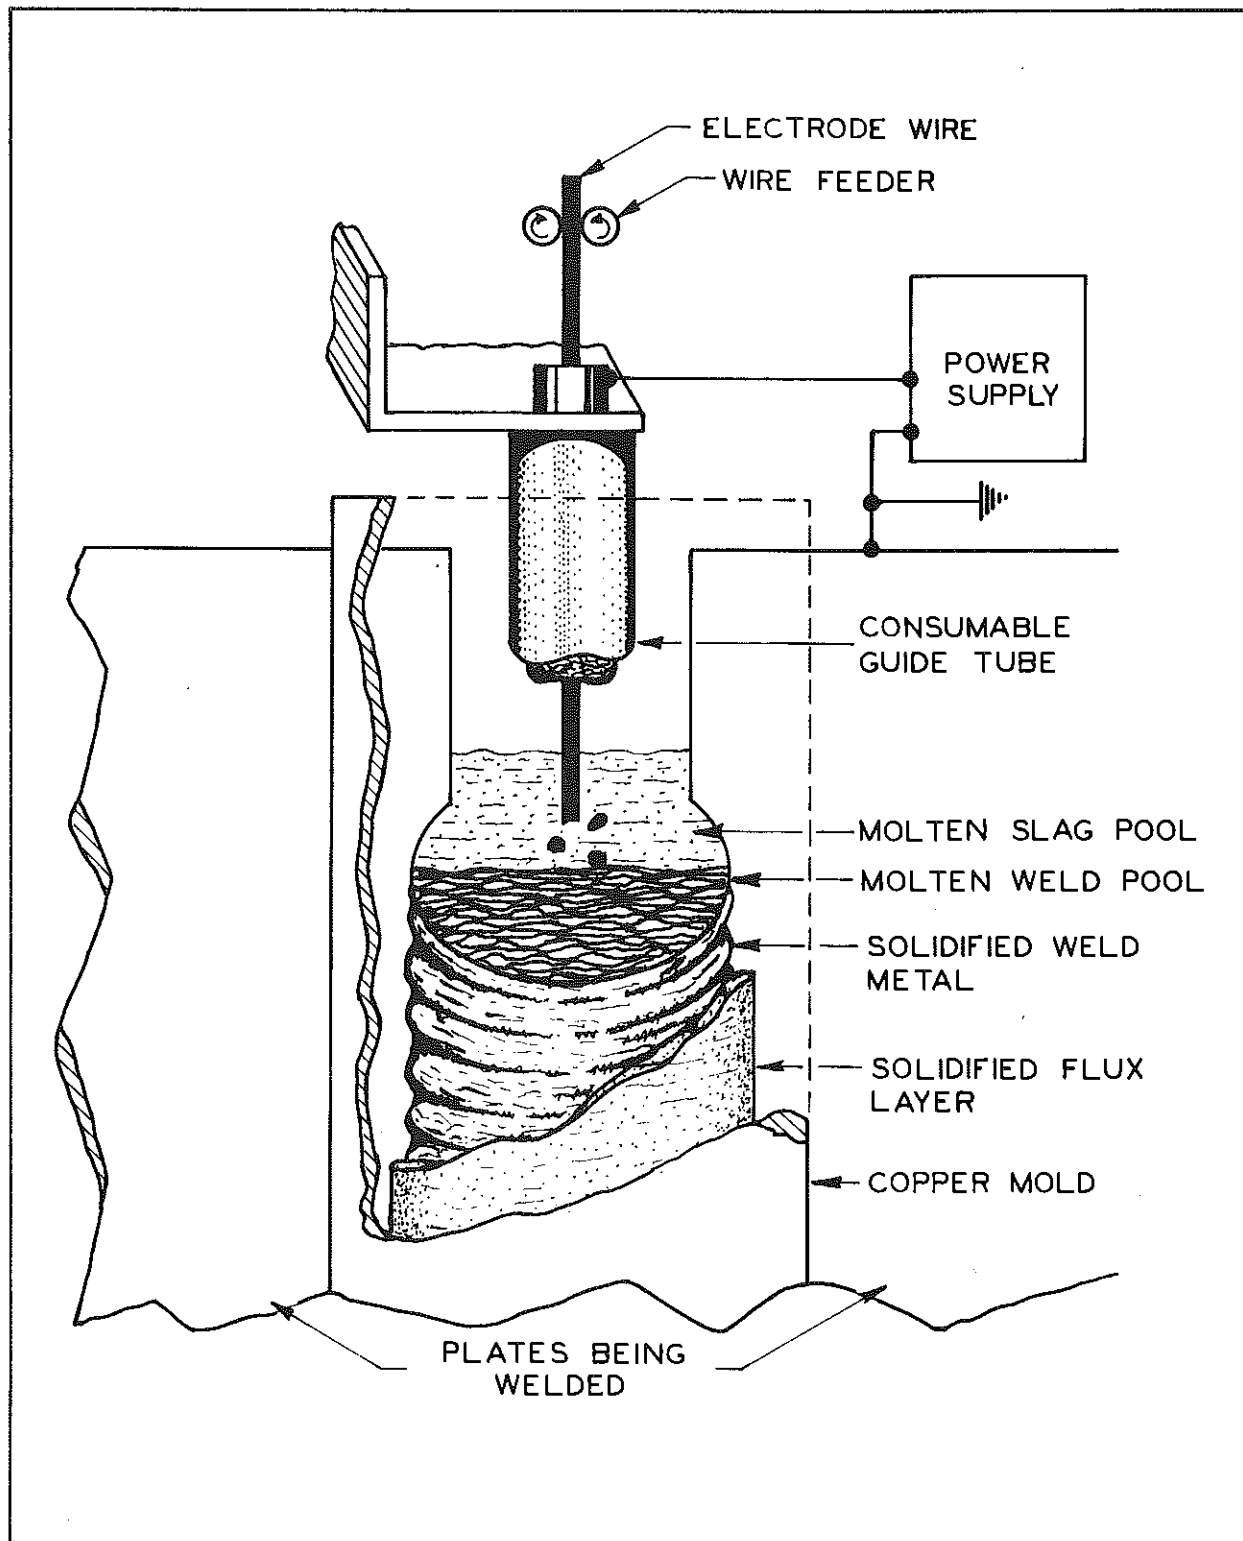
Schematic of consumable guide electros lag welding (after Ref. 6).
